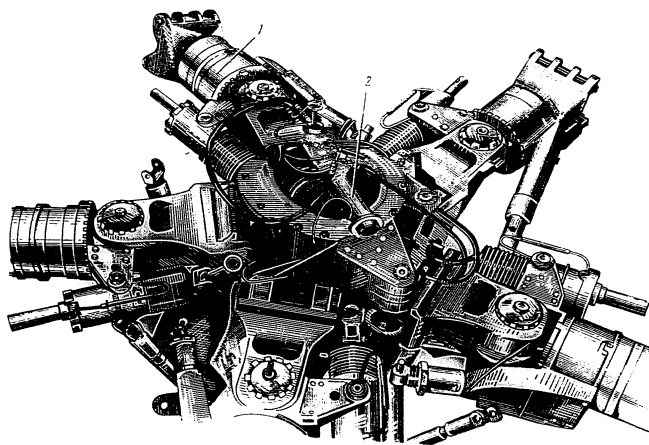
MOUNTING B9 907-000 HYDRAULIC WRENCH ON MAIN ROTOR HUB
